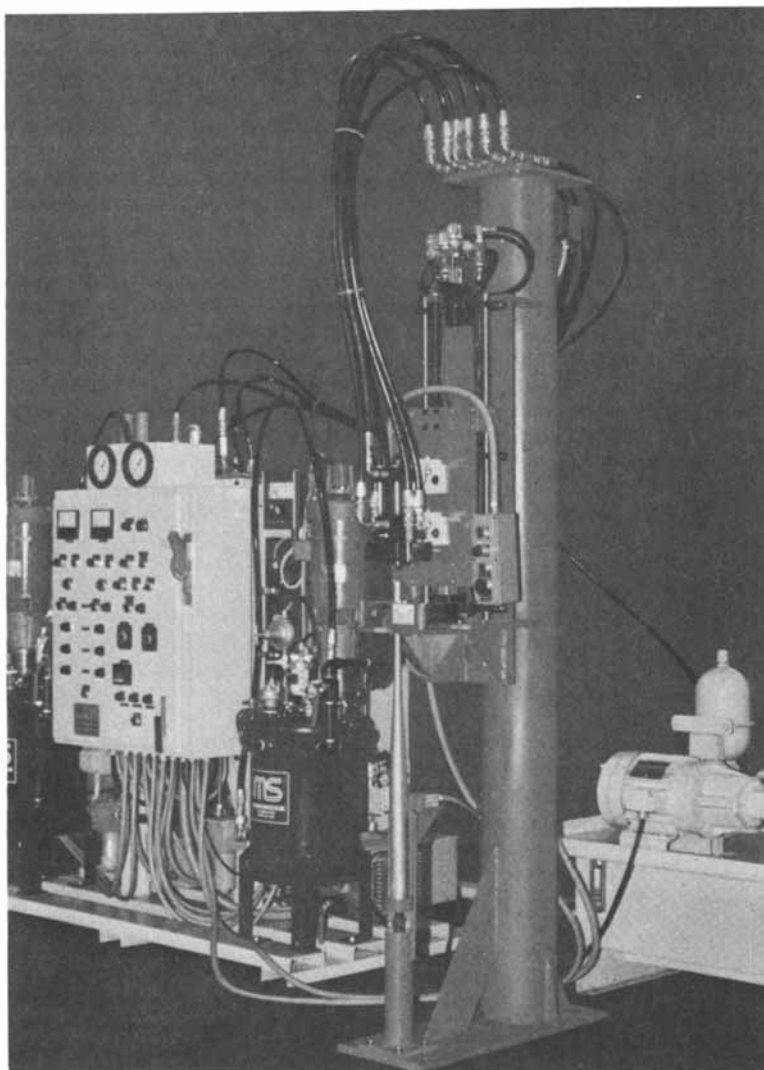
Custom RIM metering and mixing machine with fixture, for the fill of aluminum baseball bats with a small amount of flexible foam.
